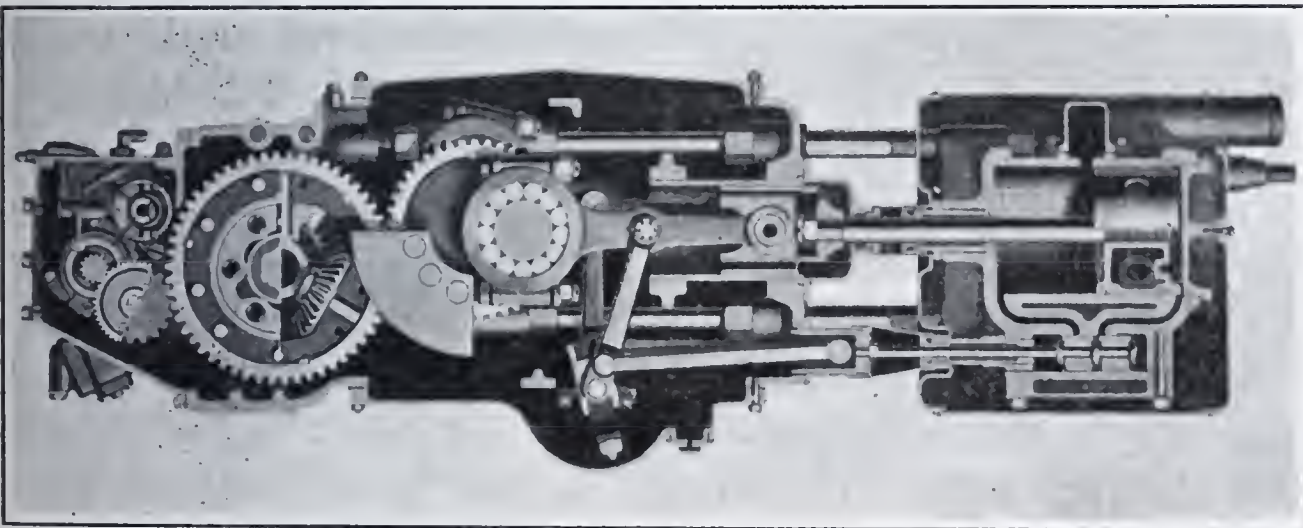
Longitudinal Section of Double-Detroit Engine, Showing Differential Gear, Pump, and Electric Generator Drive.
